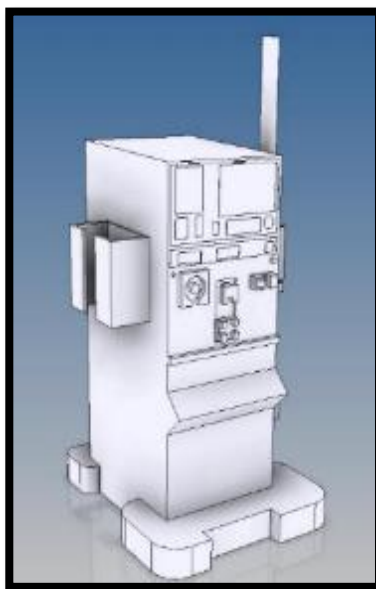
The whole base 3D of a hemodialysis machine. It is sculpted from one block instead of individually shaped and assembled
